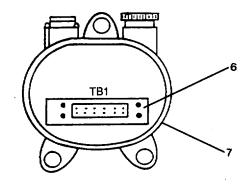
Bulkhead Mounting Bracket Replacement.
